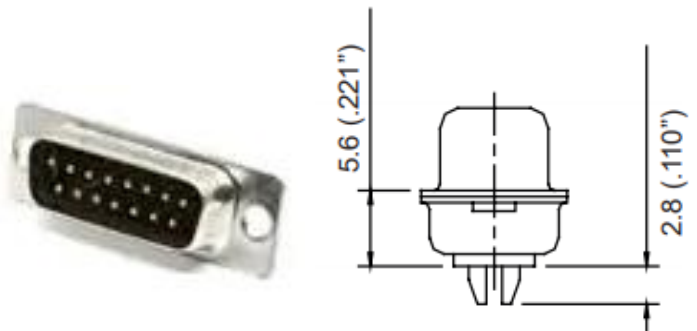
A D-Sub 15 connector with solder cups for wires. This component would be used in a unique payload if it had no PCB to connect to. It can be mounted to an end mount with wires connecting to payload components.
